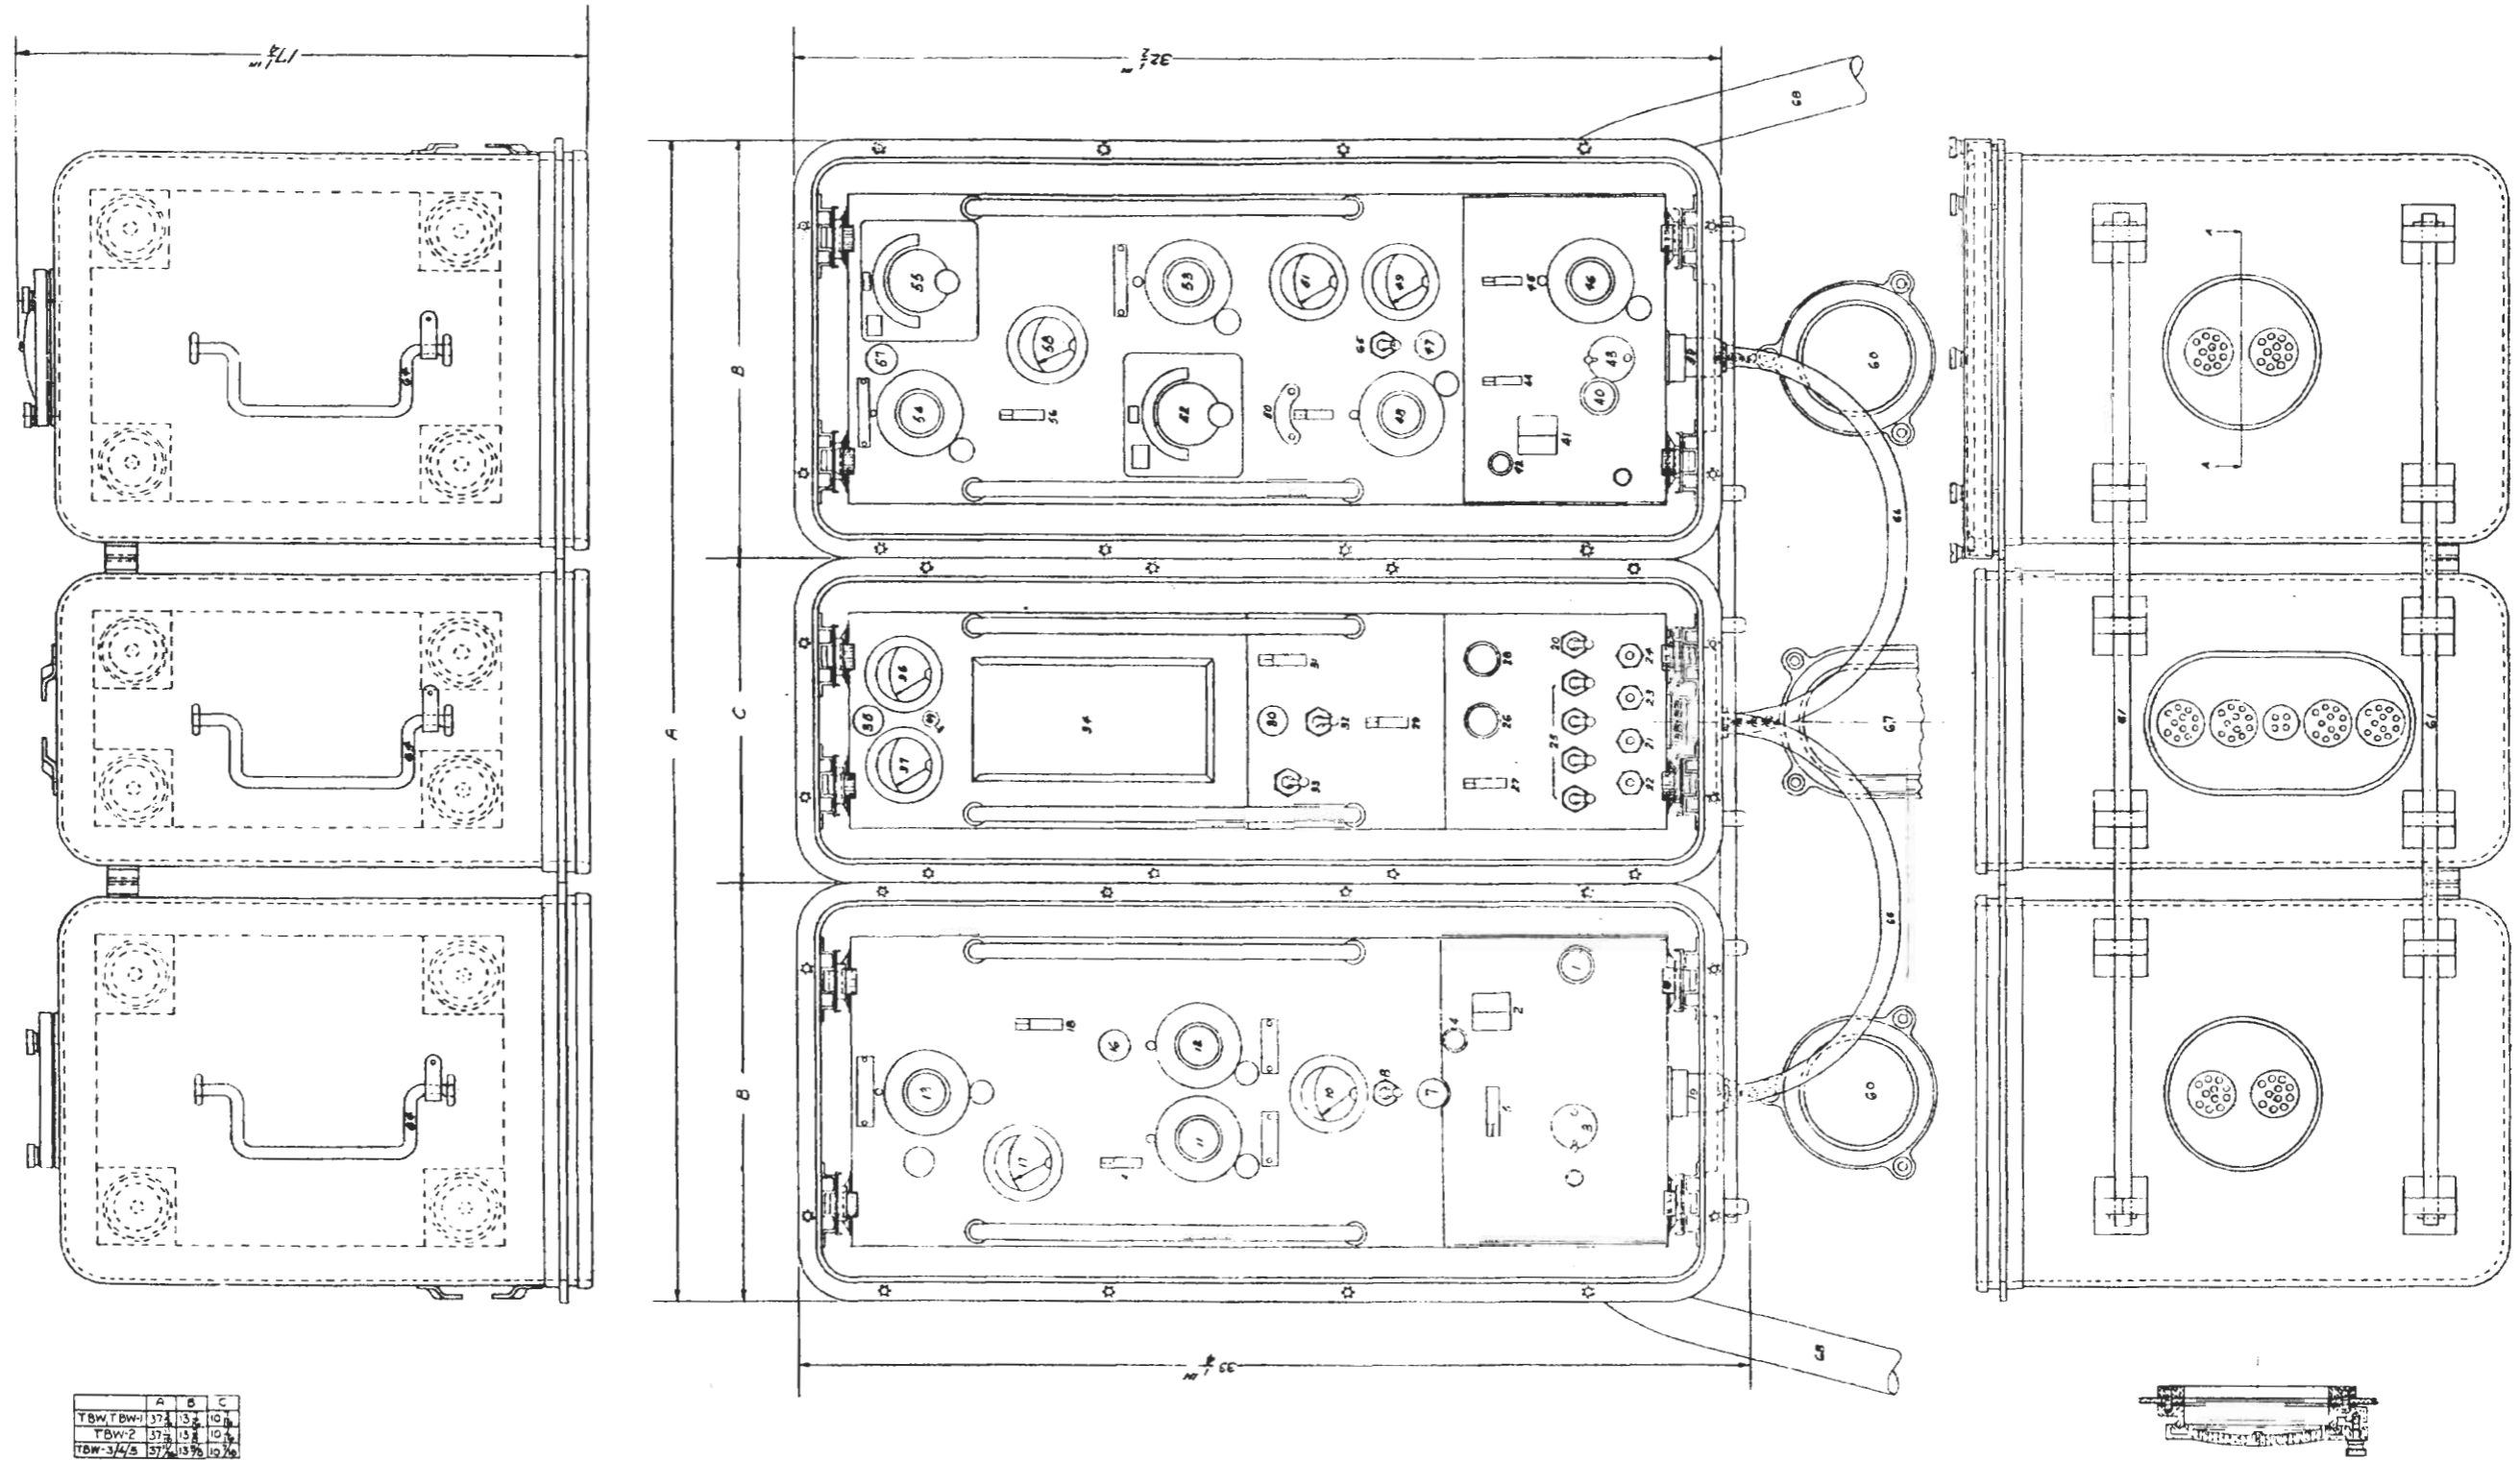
Transmitter-Rectifier Assembly, Model TBW, TBW-1 Portable Radio Transmitting Equipment, Outline and Mounting Dimensions (Dwg. W-7300364)
